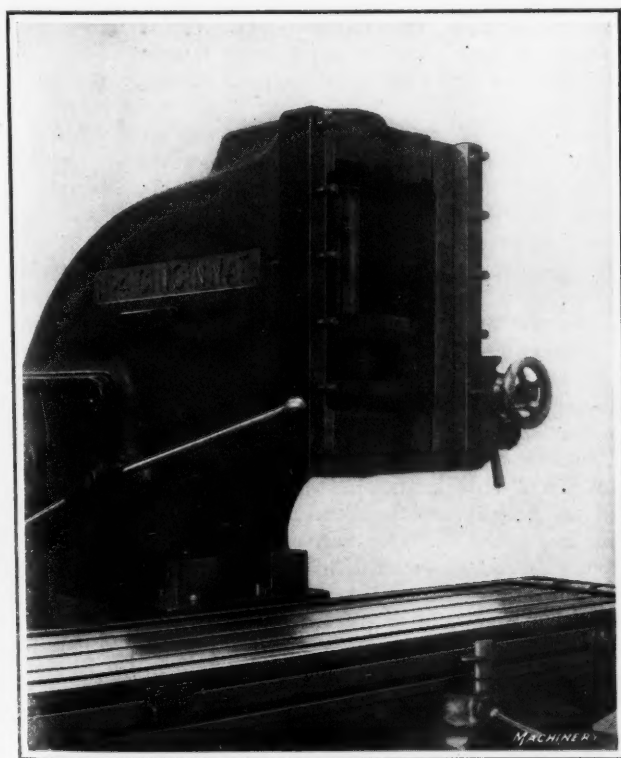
Arrangement of the Back-gear Shaft, with Spindle Head removed
